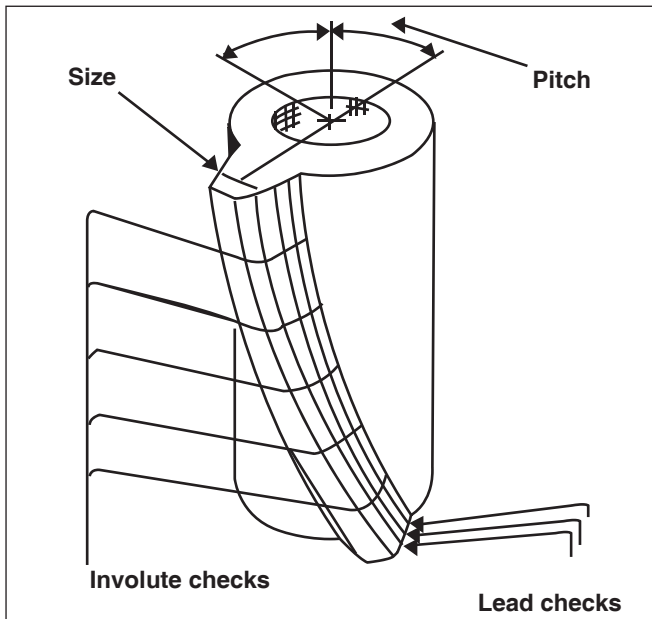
Inspecting for bias lead and involute measurements of a single tooth.
